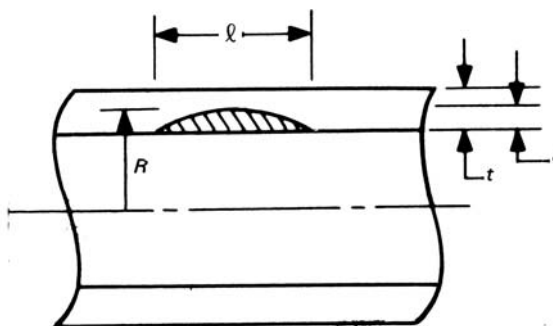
AXIAL FLAW GEOMETRY
